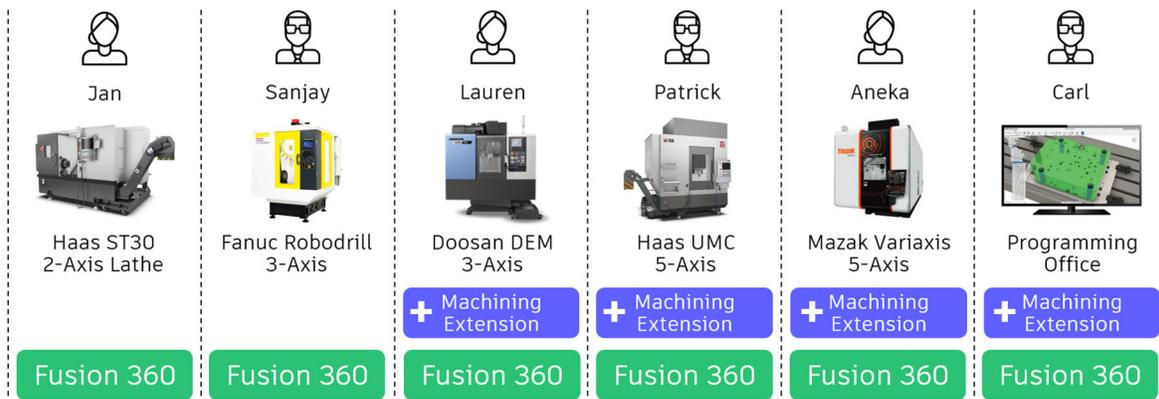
Machining Extension Added to Setup Castings Using Probing
